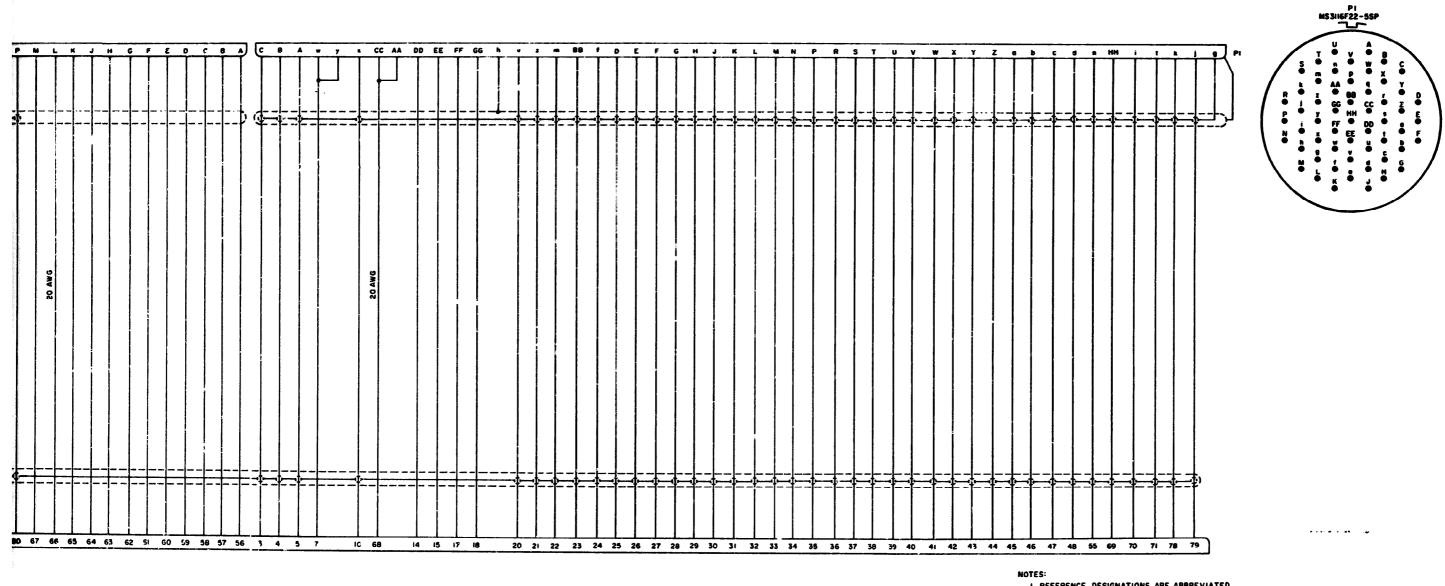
Cable Assembly, Special purpose, Electrical, Branched CX-12716/AYM-8, wiring diagram.
